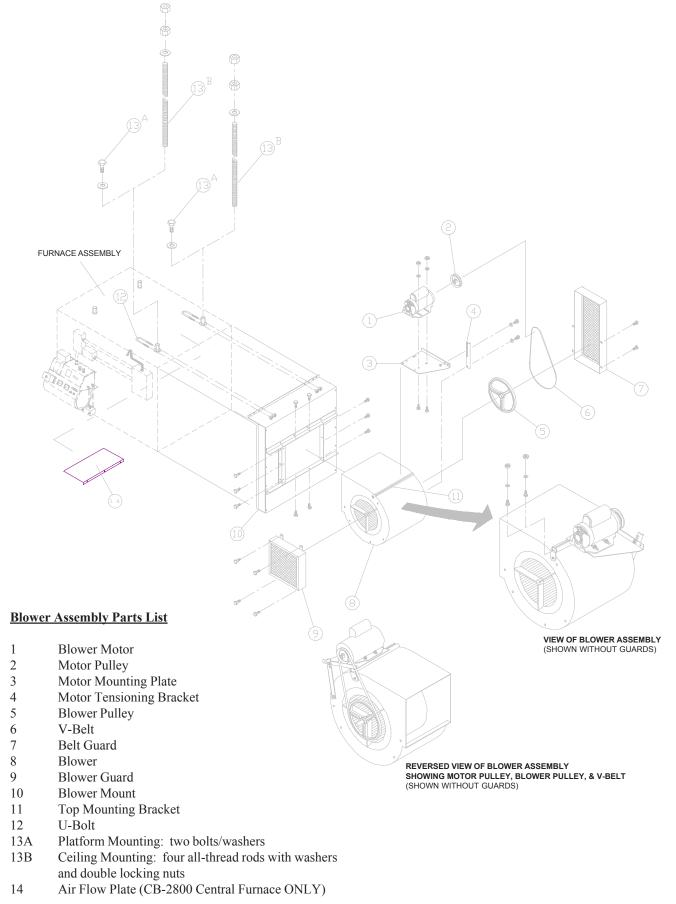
F - Detail of Blower Assembly and Installation of Blower on Furnace Cabinet
